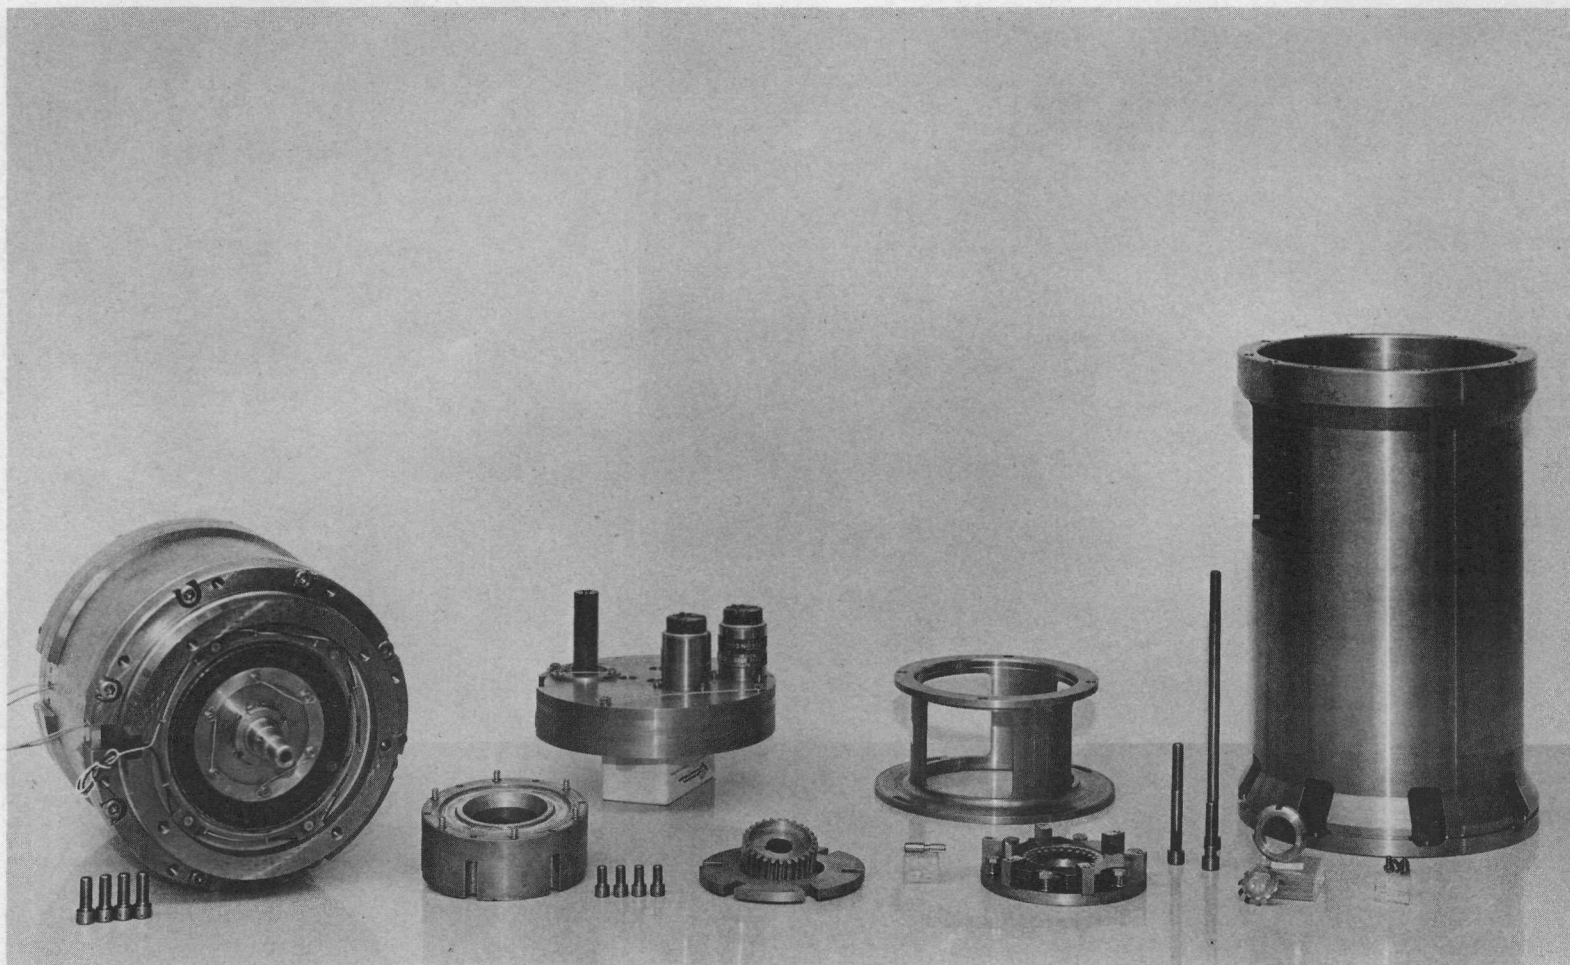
Azimuth drive motor assembly and connecting spool piece
